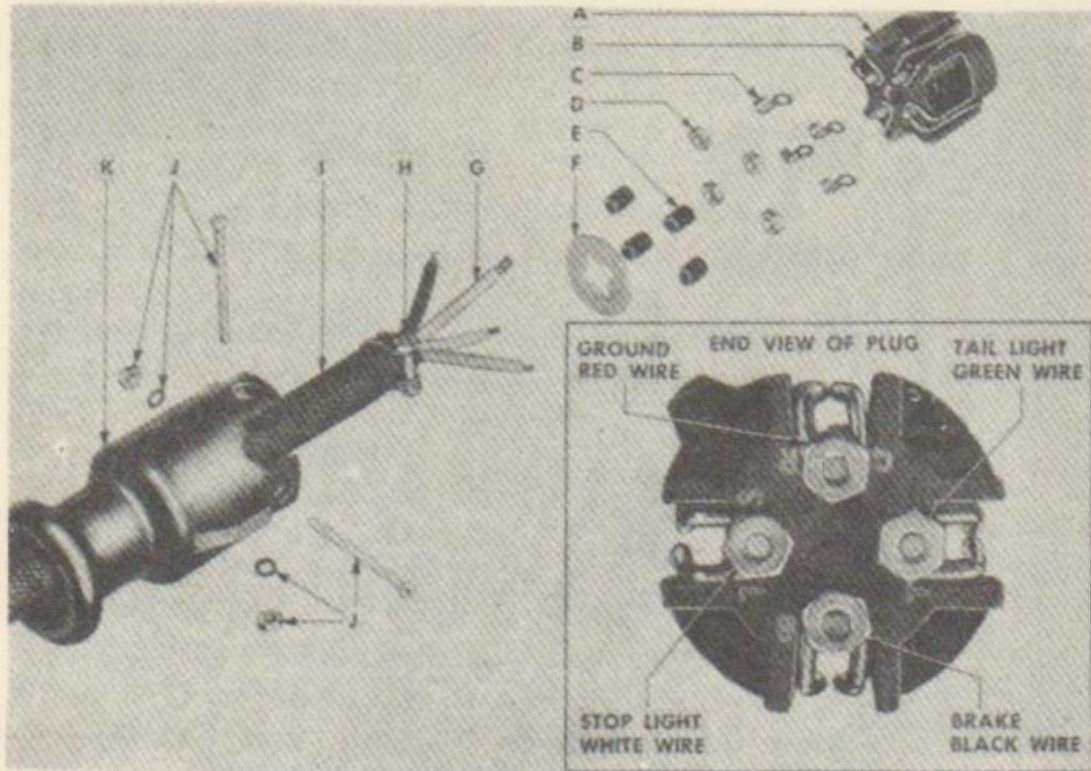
JUMPER CABLE—EXPLODED VIEW
